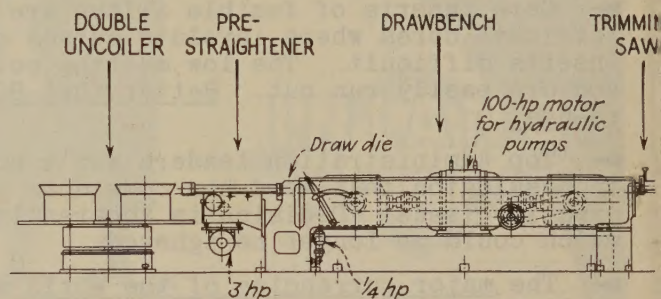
Schematic view of the Loma continuous drawing, straightening, and trimming machine.
